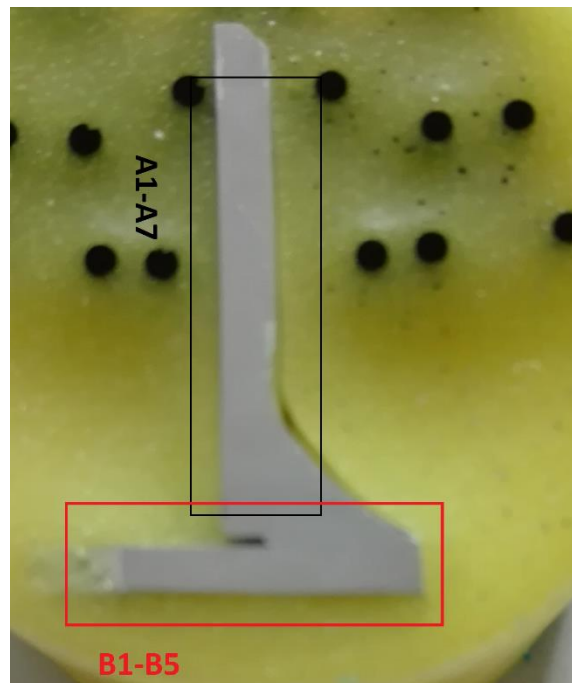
Studied areas of the MIG welding between the two 7005-T6 pipes.
